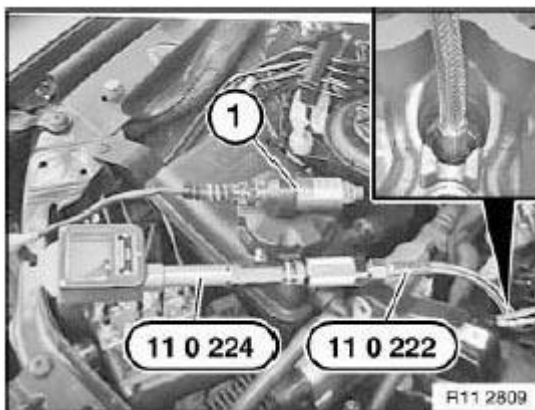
Identifying Special Tools 11 0 222 And 11 0 224
